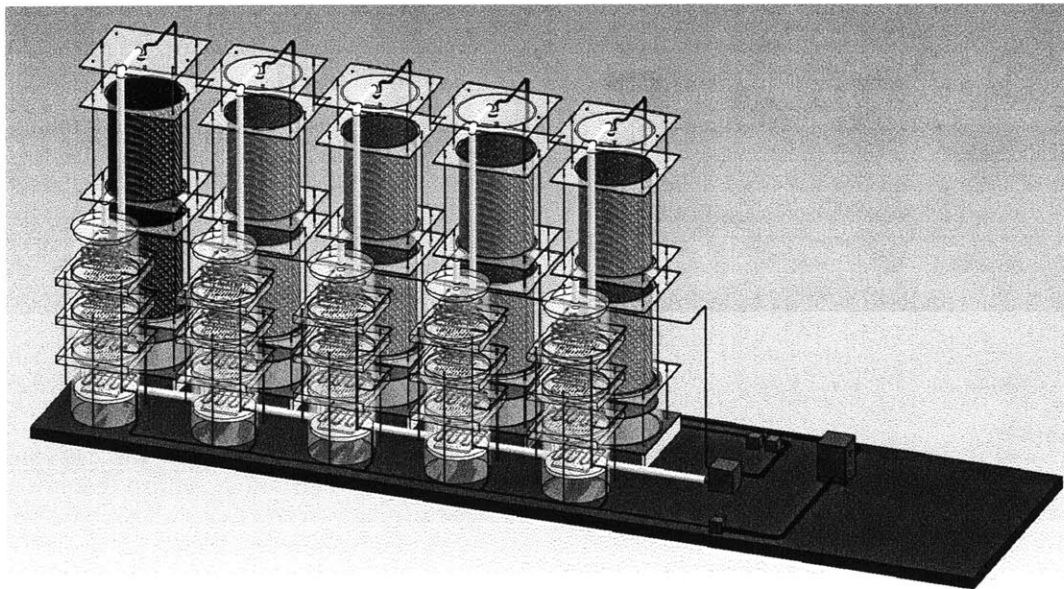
2: Full MDS Solid Model Assembly – Isometric View
